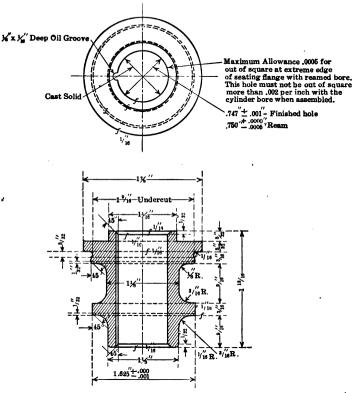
Push rod guide (cast iron) of Continental engine.
